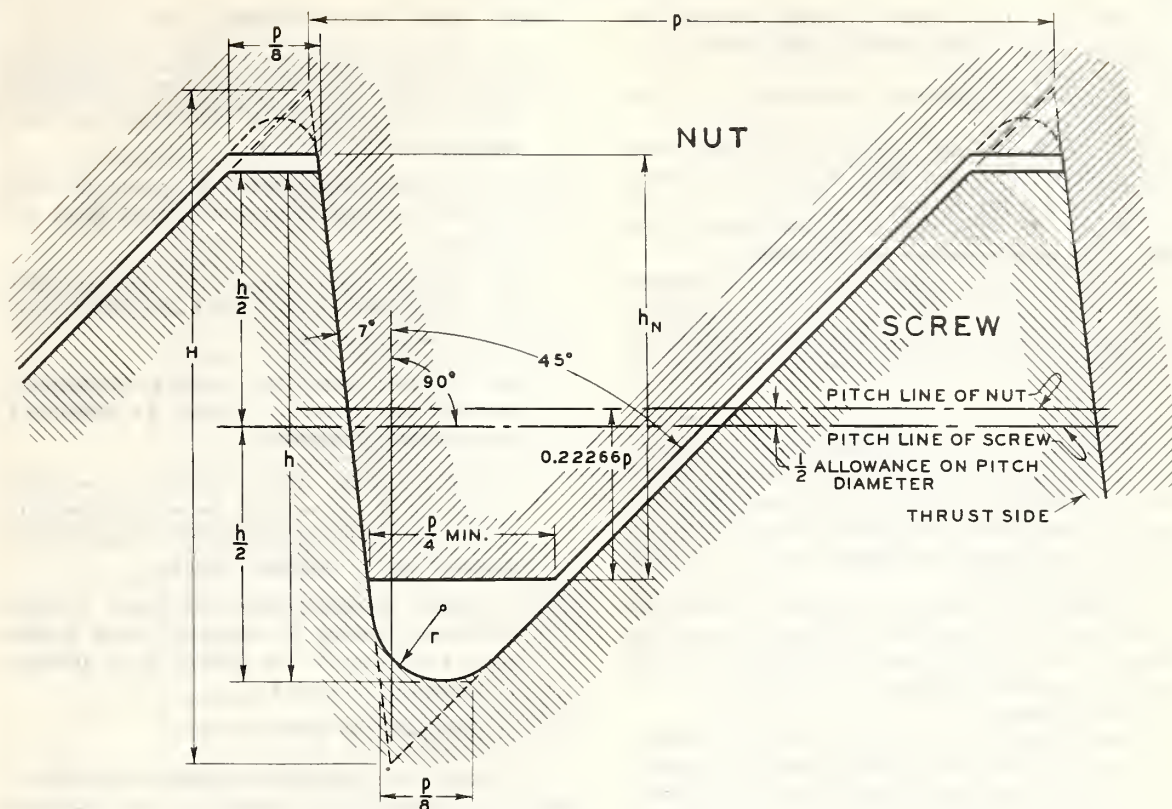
Recommended standard basic thread form for buttress threads.
